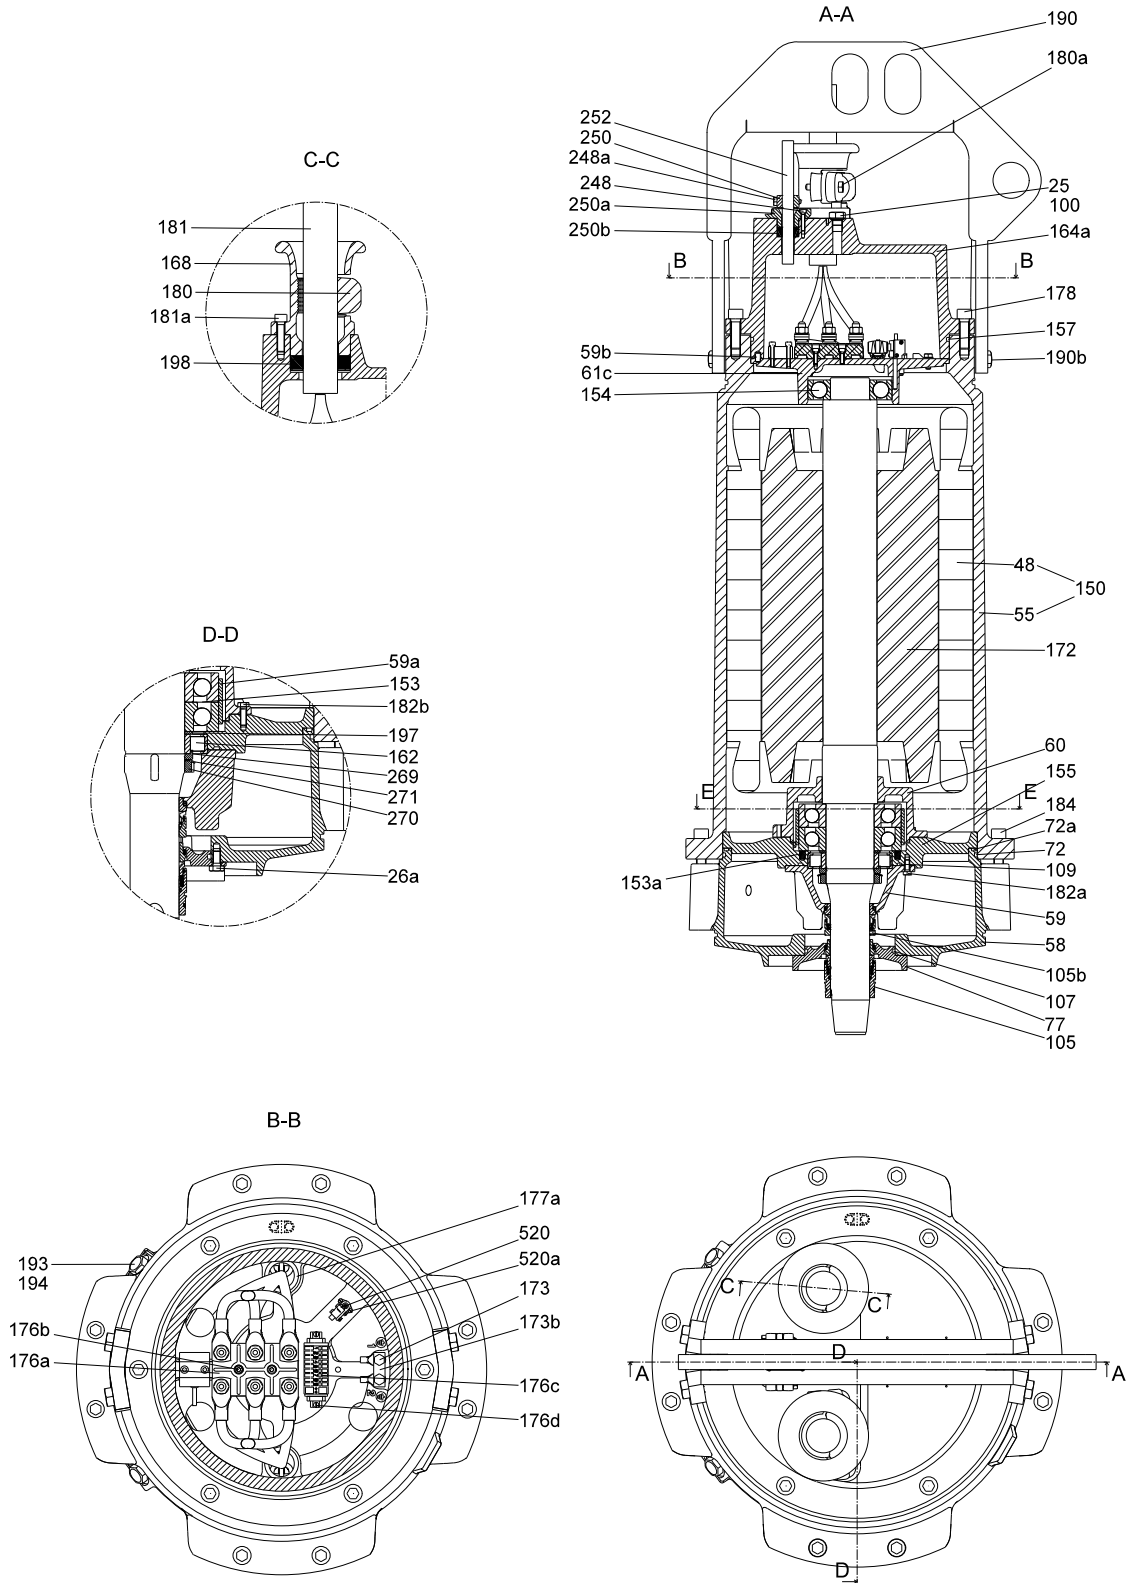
Non-explosion-proof motor, without cooling jacket (installation type S)
